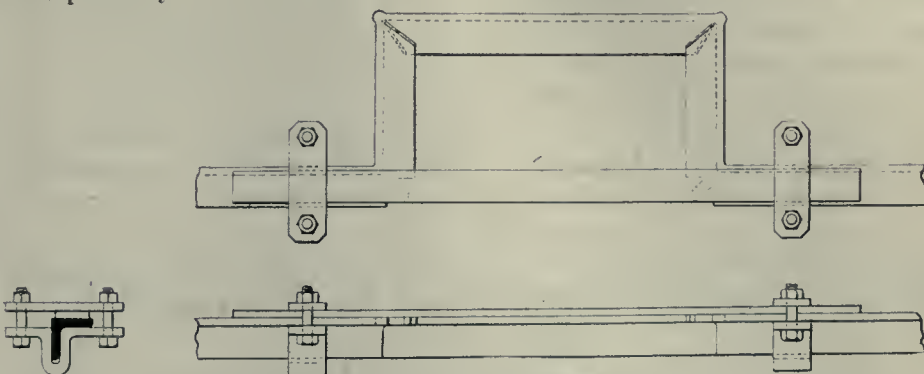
SECURING ANGLE TO BE WELDED.
